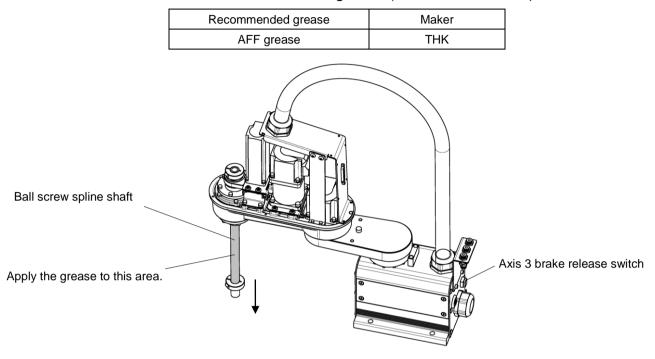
Greasing lower side of ball screw spline unit (KHL-300, KHL-400)
